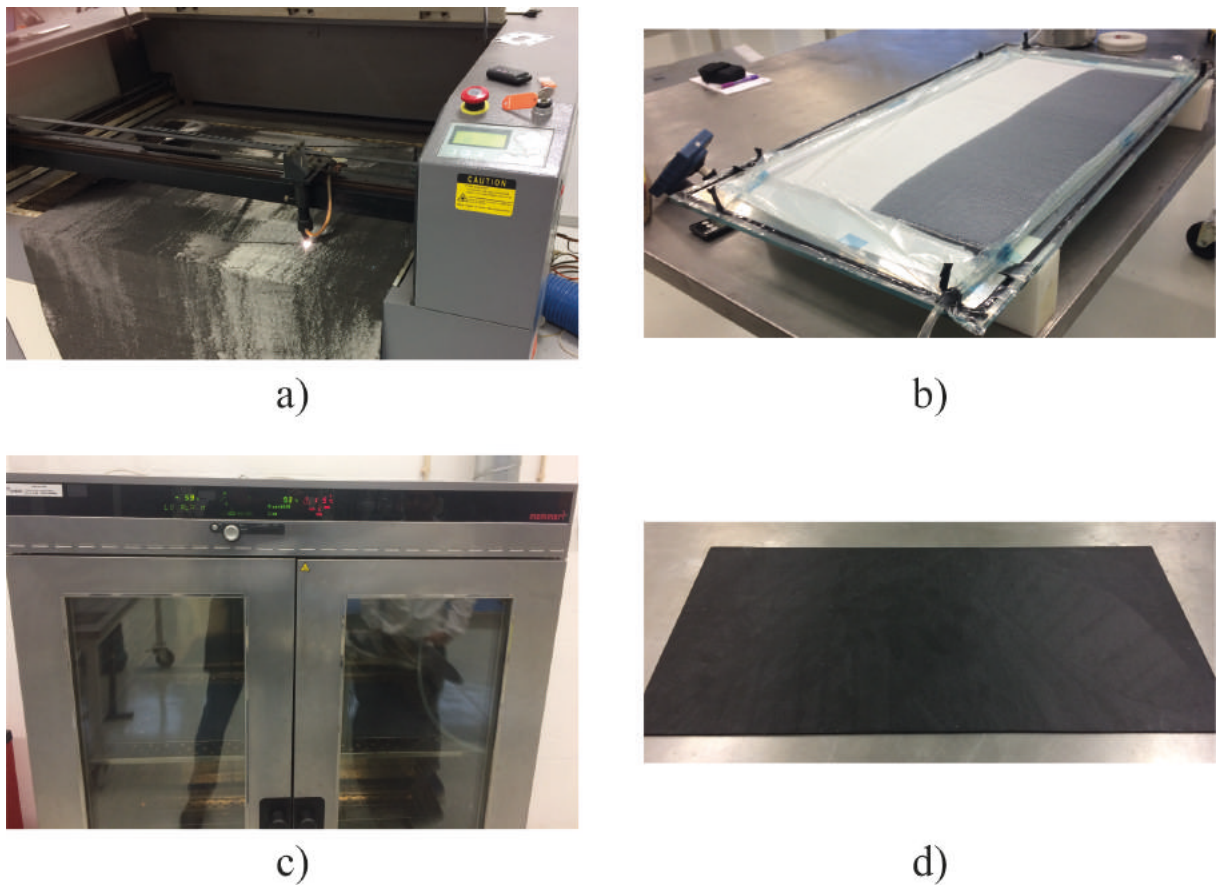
Photographs of the main manufacturing steps, namely a) fibres laser cutting, b) ongoing vacuum bag infusion fibres impregnation, c) composite laminate post-cure and d) final composite laminate plate.
